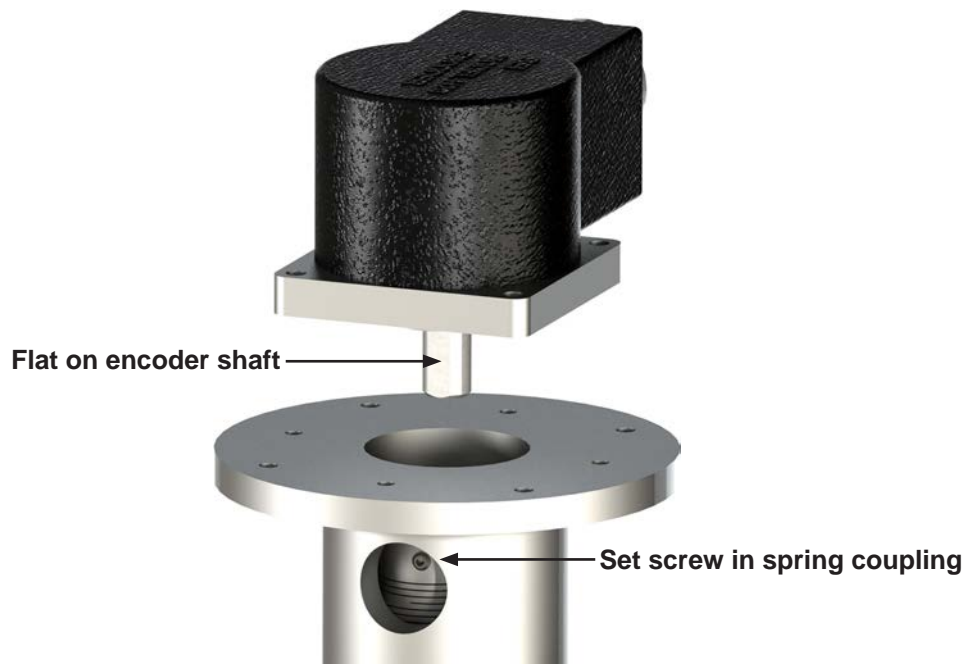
Mounting Encoder To Encoder Mount
